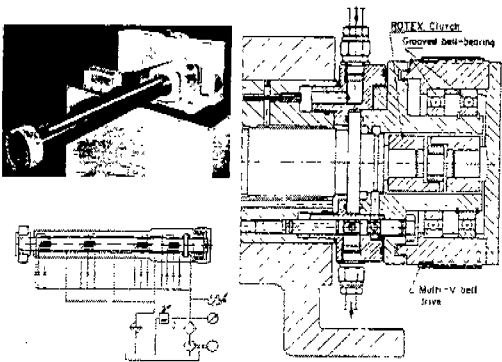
Internal grinding wheel spindle with hydrostatic bearings
